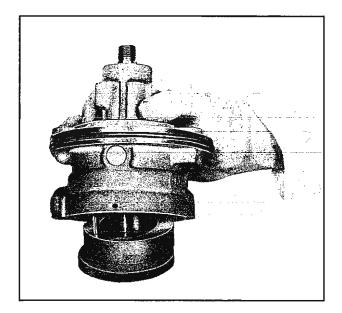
A-44 Pressure Plate and Rotor Ring Removed
